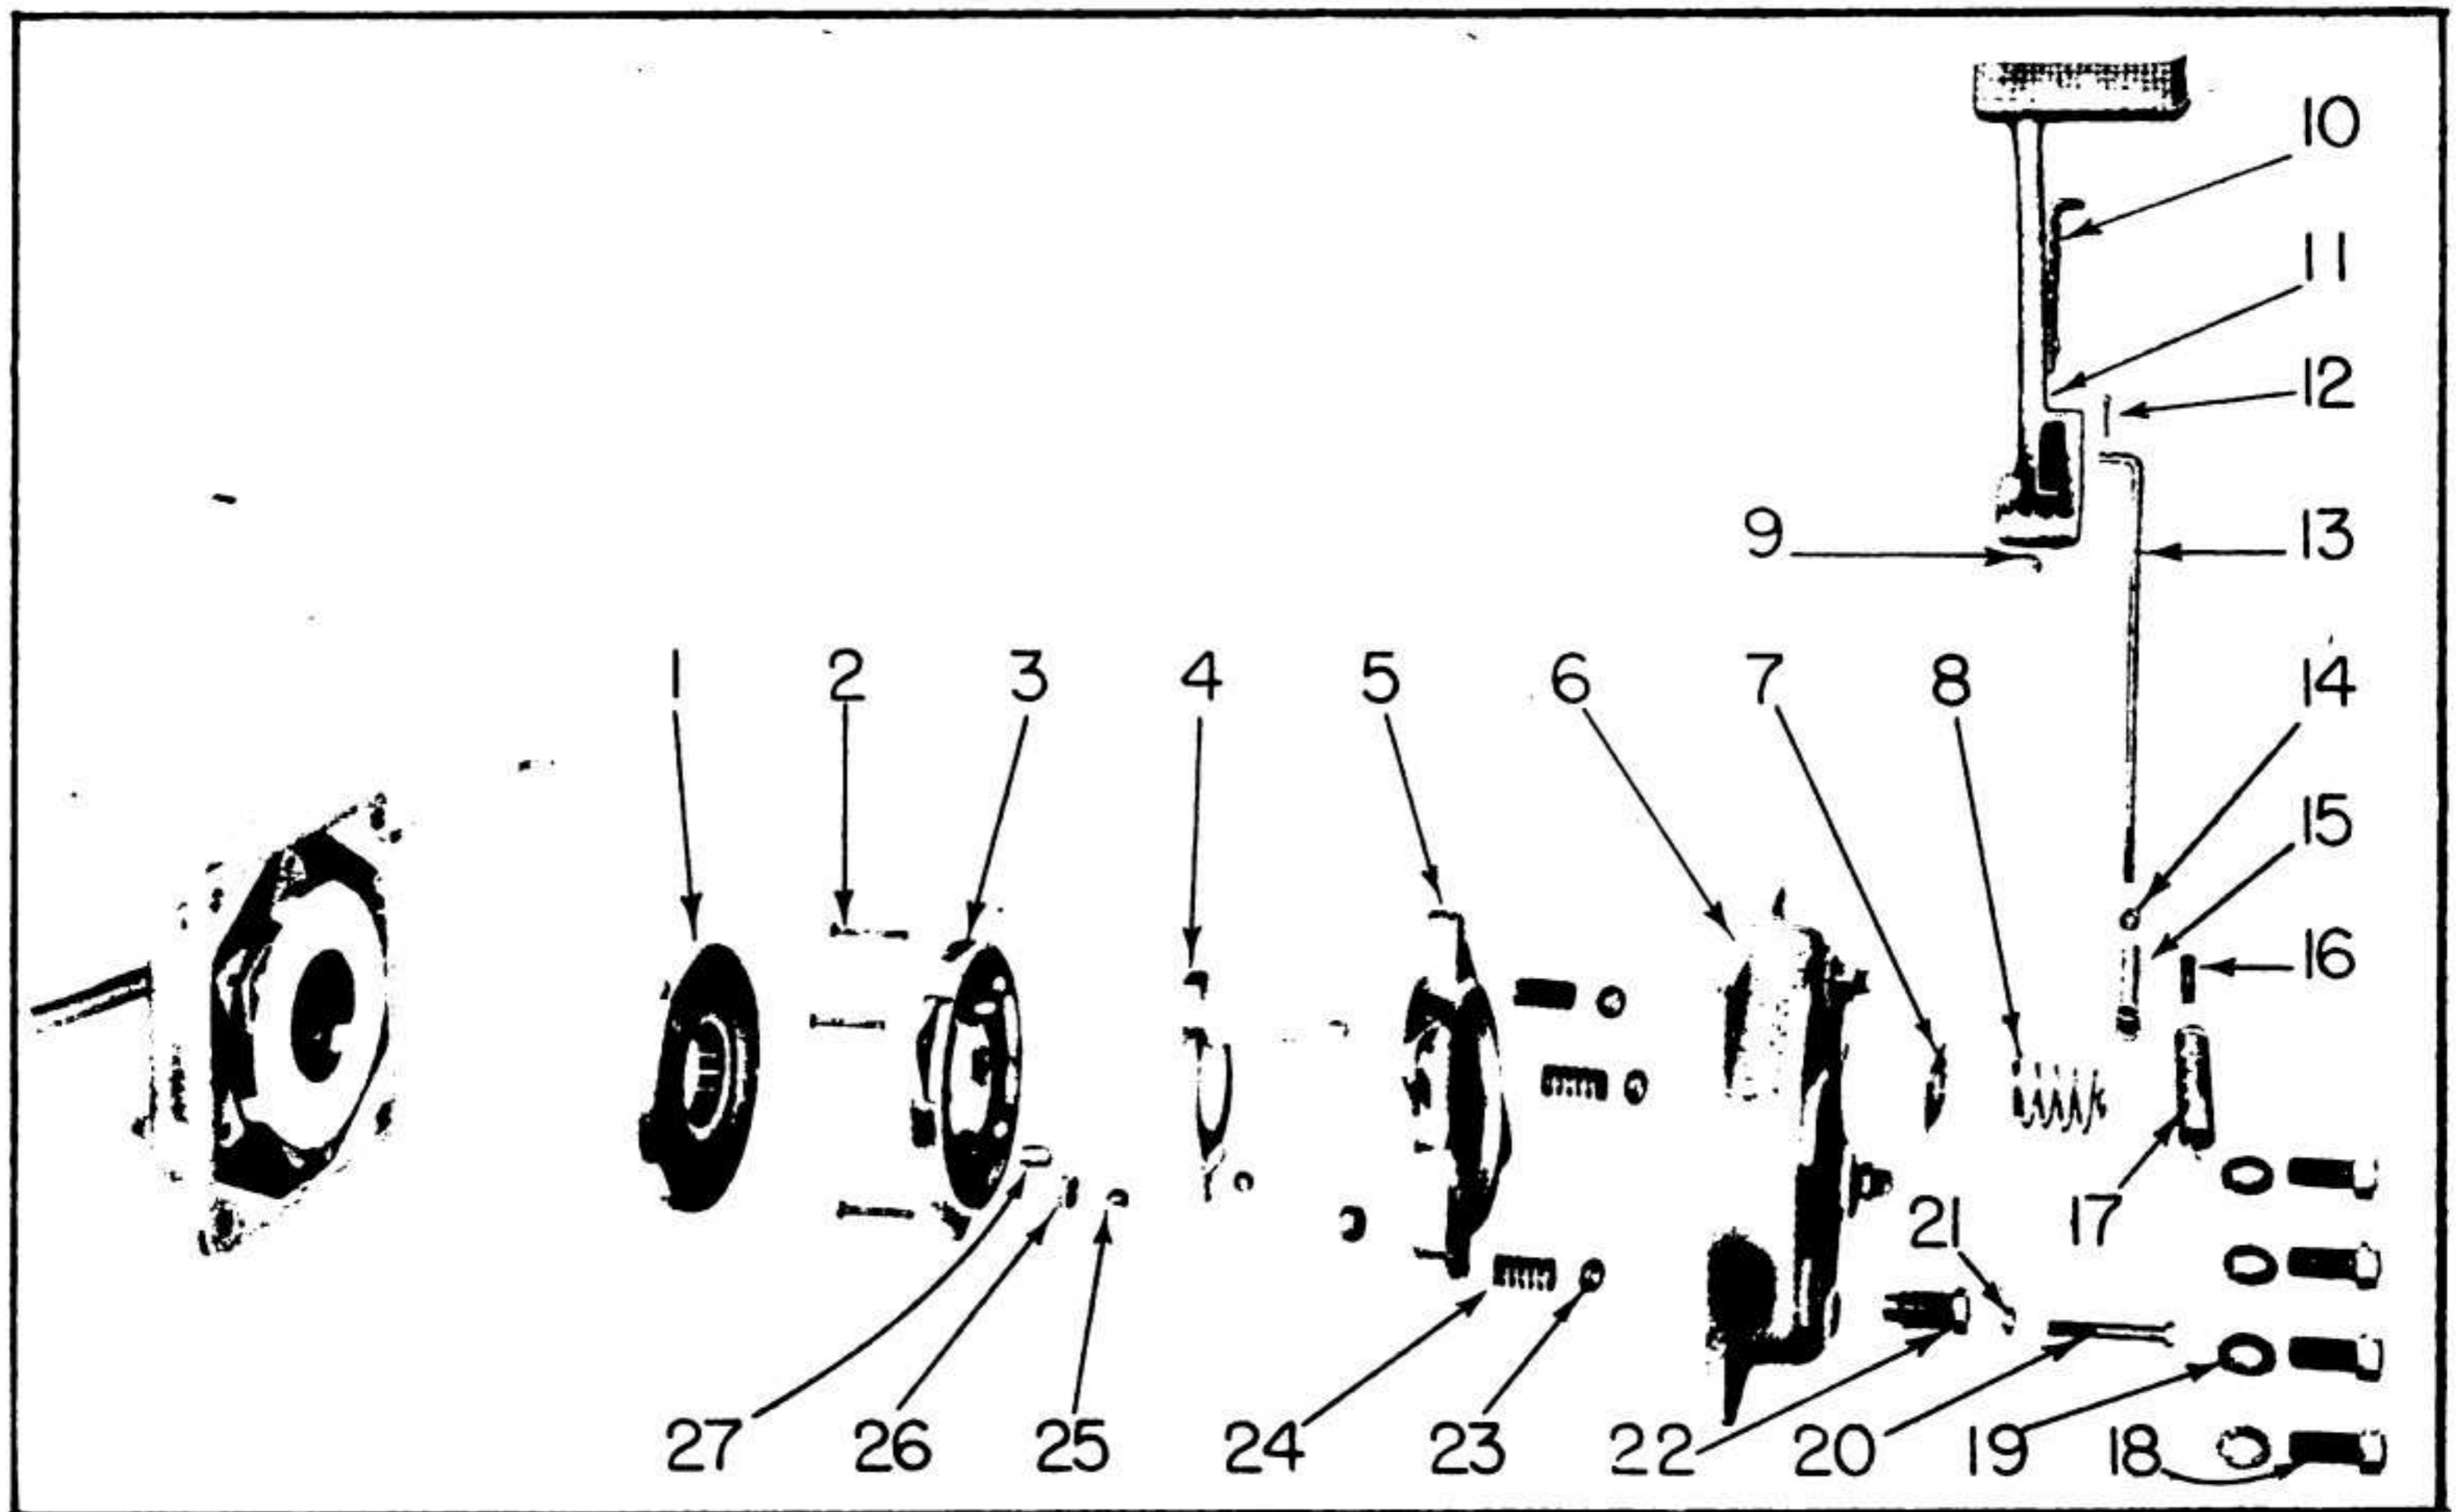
1201 BRAKE ASSEMBLY
